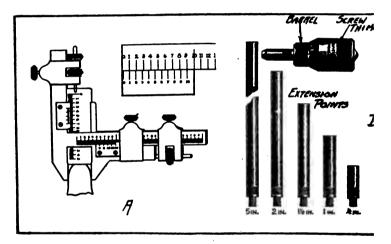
At Left, Special Form of Vernier Caliper for Measuring Teeth; at Right, Micrometer for Accurate Internal Measuremen
